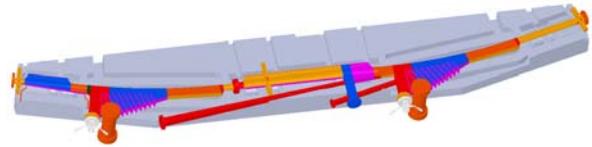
View of the DBA magnet (lower half) with the vacuum chamber inserted [11].
